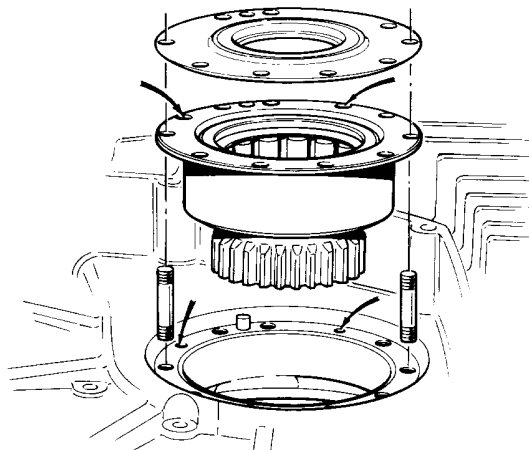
Aligning the stationary gear during assembly into the housing, illustrating the use of guide studs, and the importance of keeping clean the oil supply holes (arrowed).
